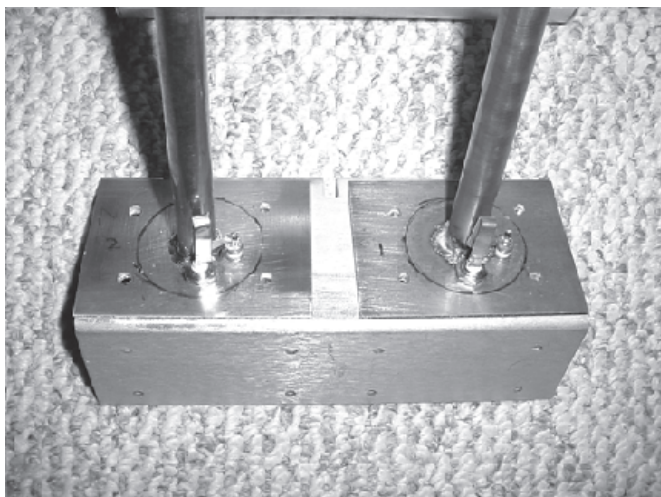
Photo C — This photo shows a completed end assembly for one pair of the duplexer cavities.
